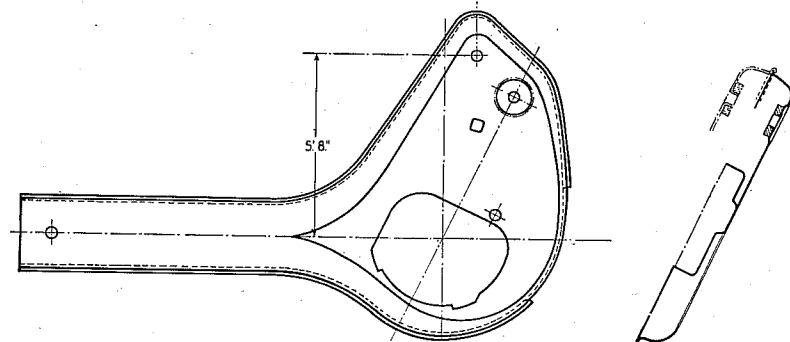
(below).—Dimensioned drawing of fork-leg outside pressing (16-gauge deep-drawing steel)
